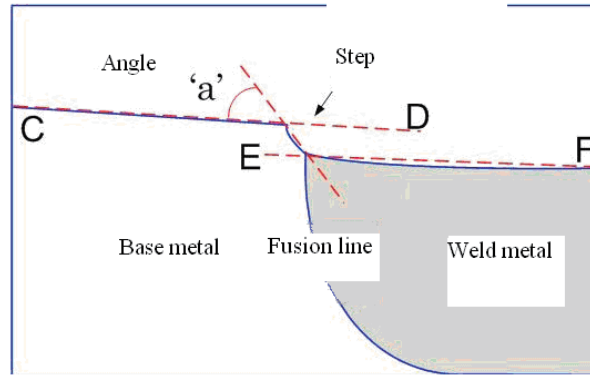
(3) Measurement for angle of weld corrosion
